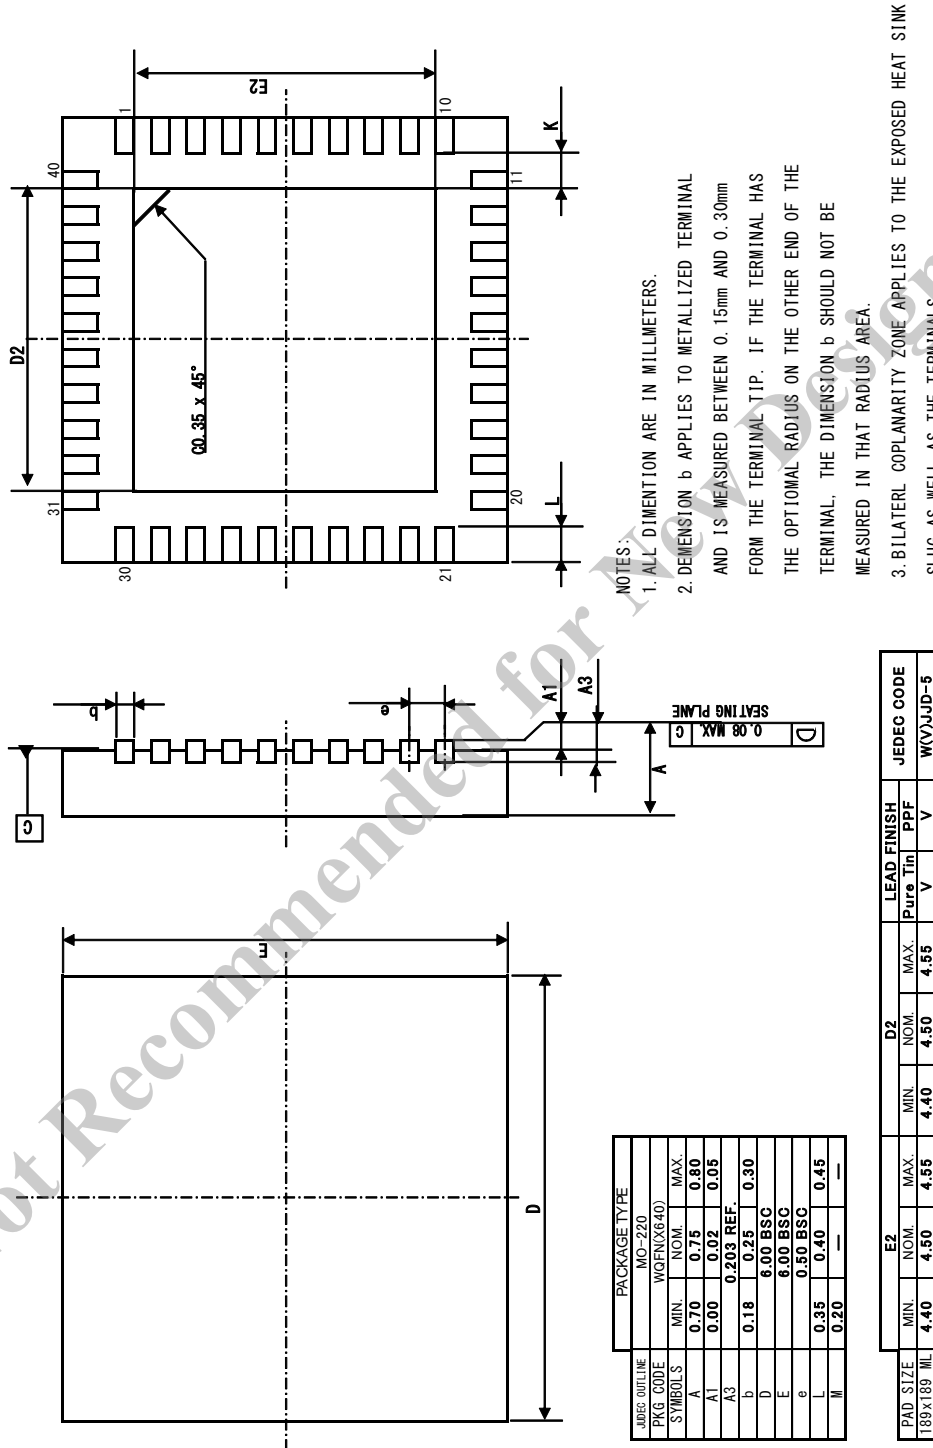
QFN40_PKG_dimensional outline drawing.
